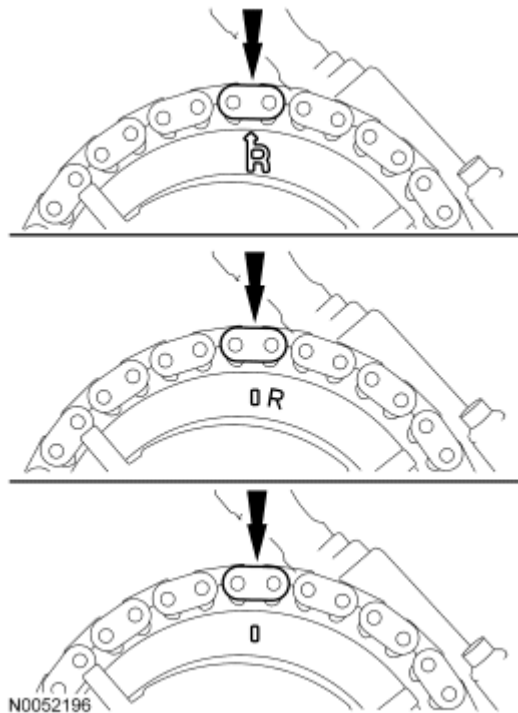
Locating Camshaft Sprocket Timing Mark Aligned With Copper Chain Link
